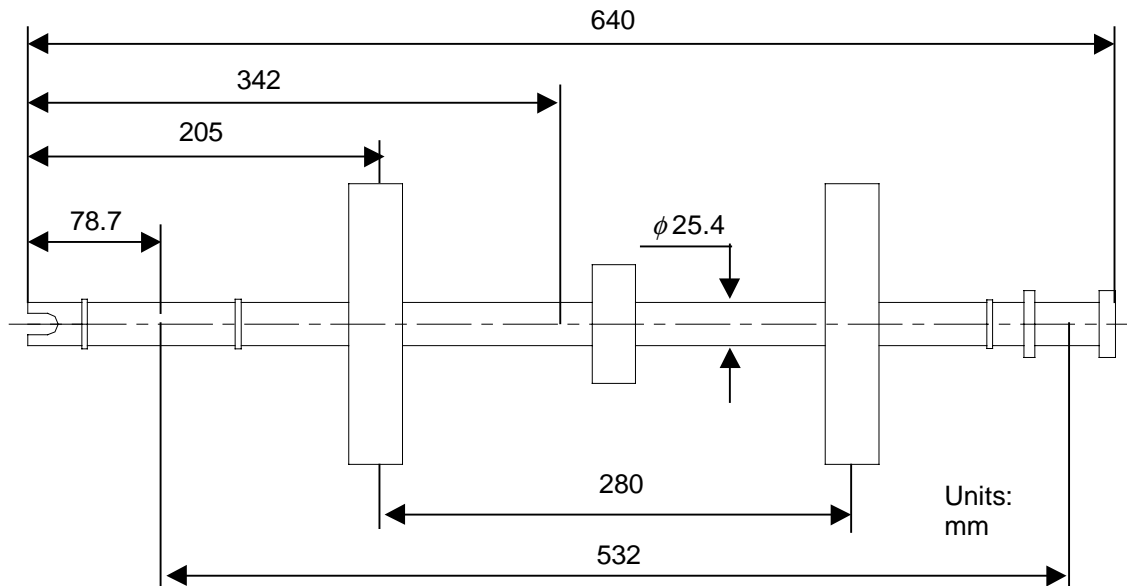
Flexible rotor for bearing parameter identification from imbalance response measurements ¹
